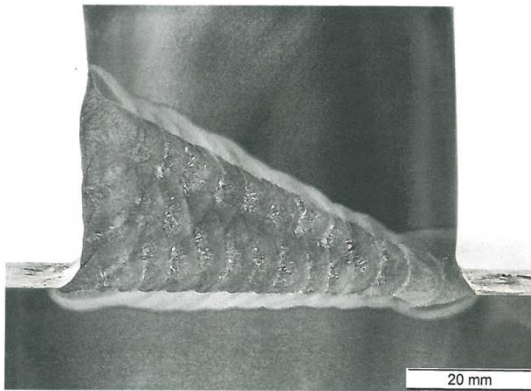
General view of metallographic section 126_MG/2 perpendicular to the weld axis
